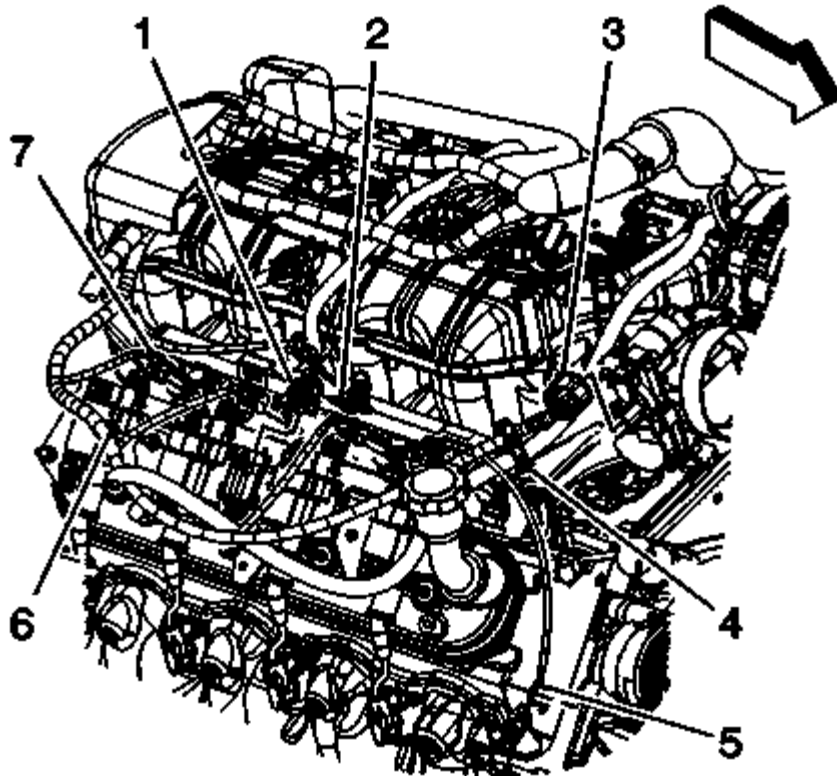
View Of Engine Harness Retainer Nut & Electrical Connectors
